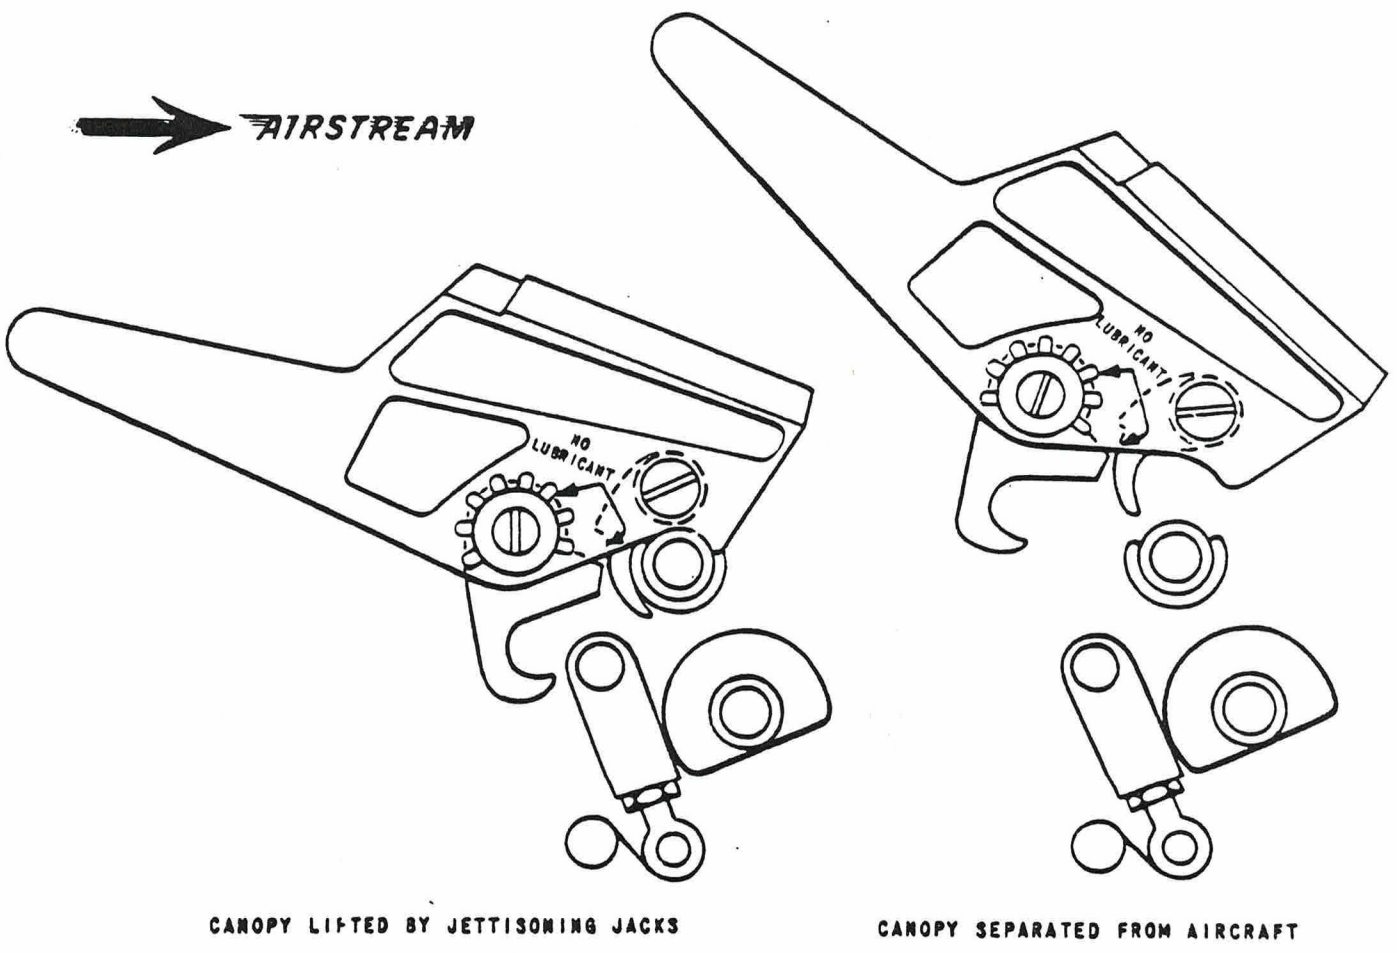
LOCKING MECHANISMS TORQUE SHAFT
